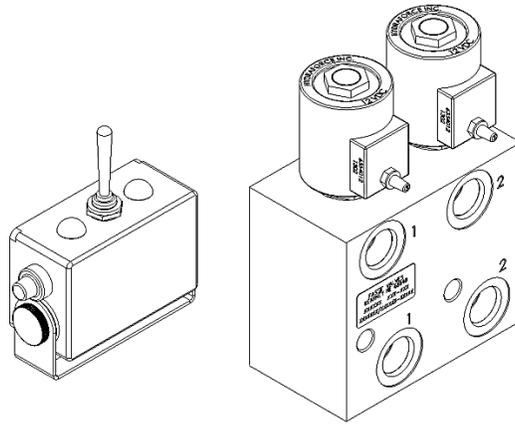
Remote Switch Box (Left) and Selector Valve Block (Right)
